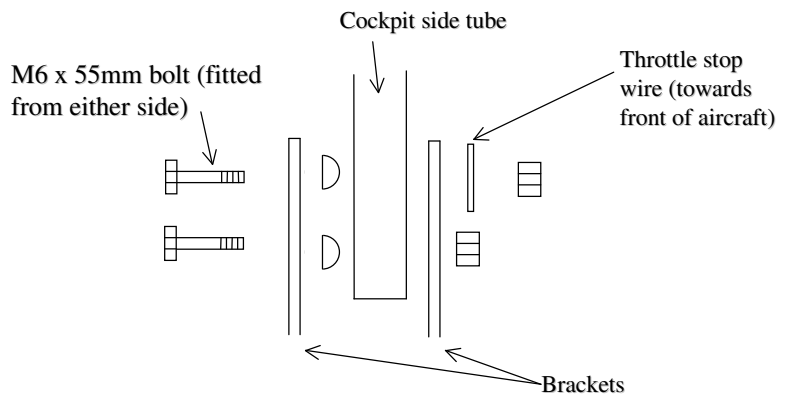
Cockpit side tube fixing with throttle stop wire fitted, left hand side shown.
